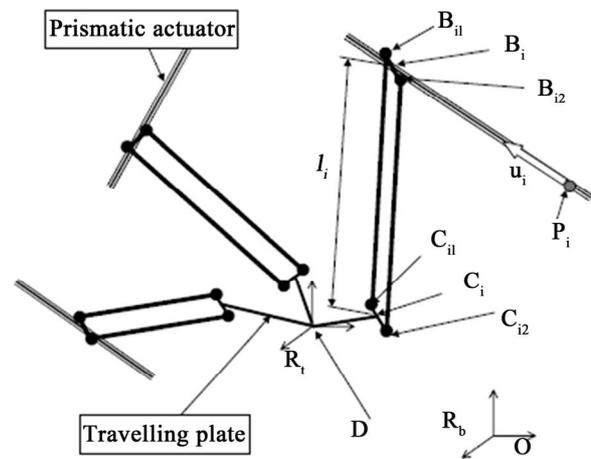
Use of linear drives in delta structure for 3-axis parallel machine tool [17].
